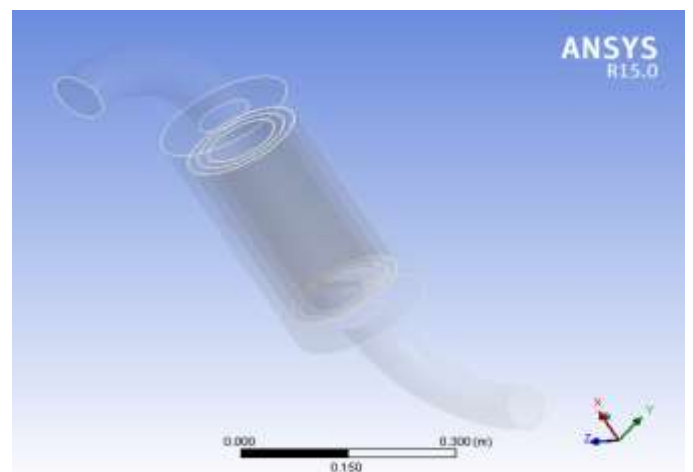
(c): 3D Model of Circular shaped fluidized bed cooling tower.
